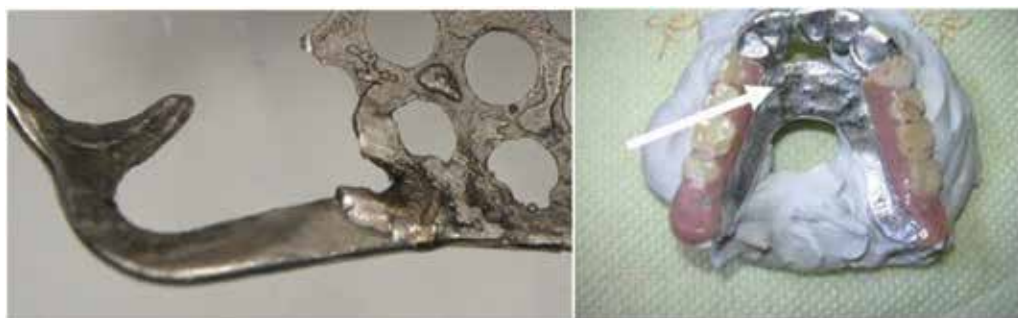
Laser welding of a fractured clasp and frame.
